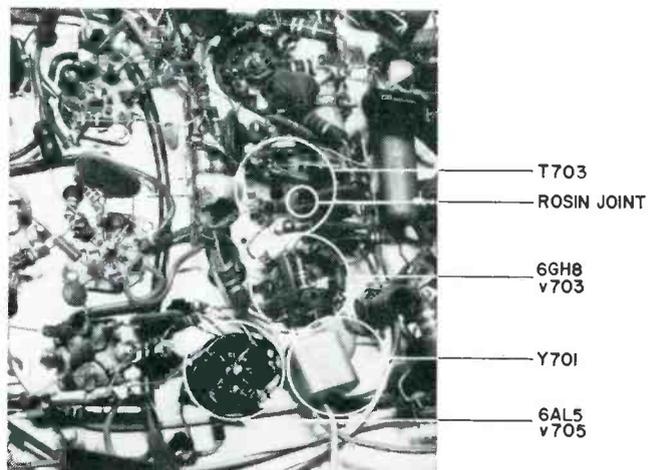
'We plugged in the soldering iron and heated up a rosin joint.'
